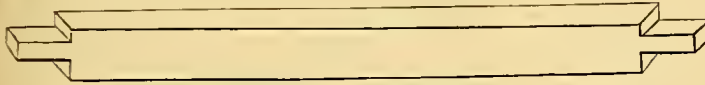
SHAPE OF TOP AND BOTTOM.
